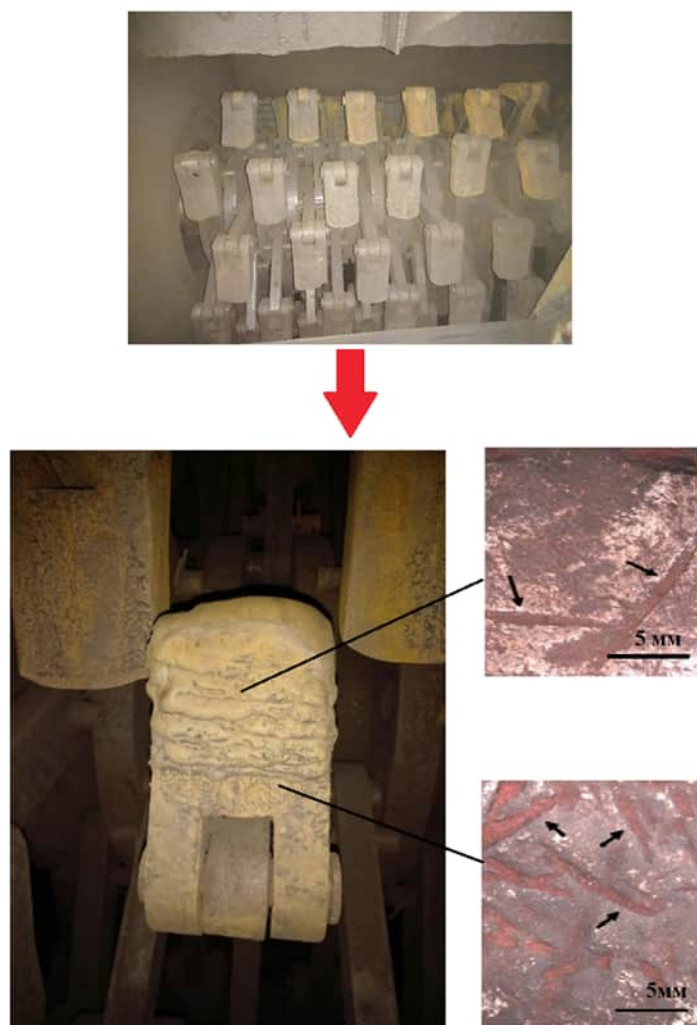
Inspection of welded beaters after 466 hours of testing
